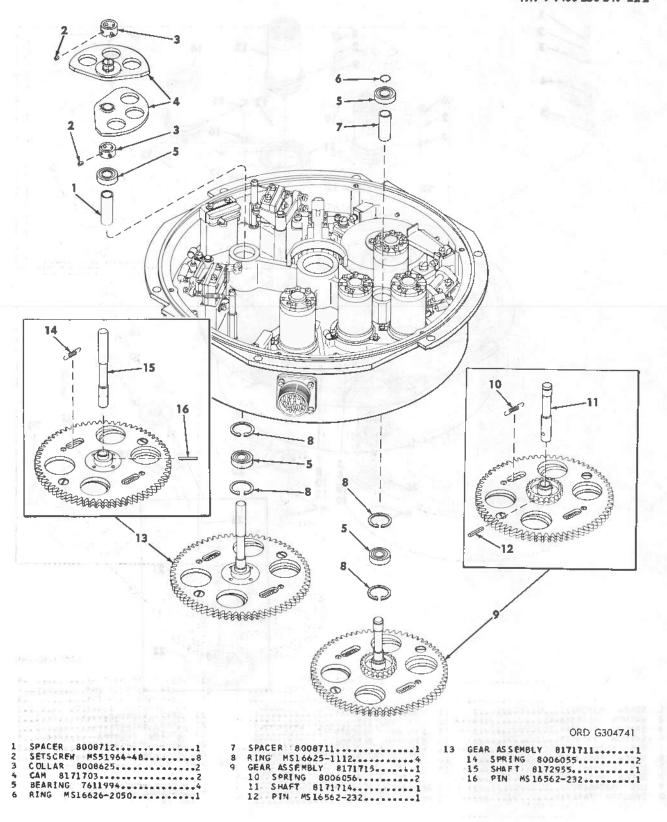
TRANSMITTER, POSITION, GUIDED MISSILE /9007946/-PARTIAL EXPLODED VIEW
